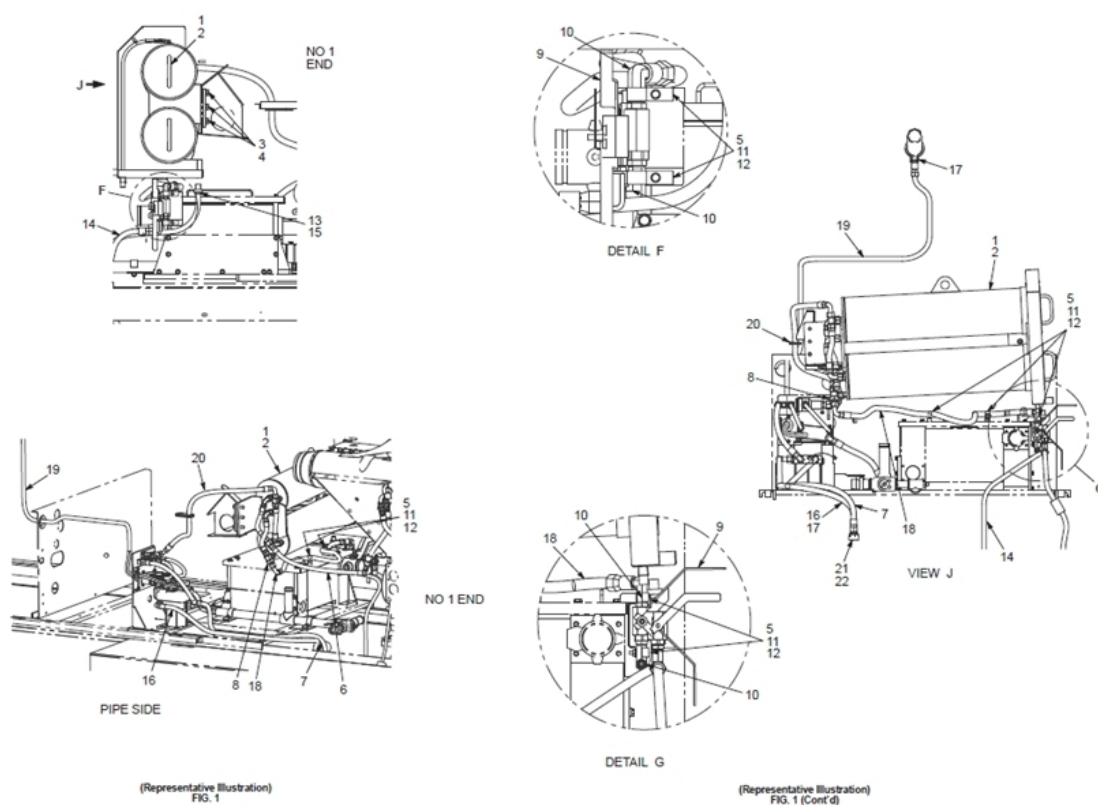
Renewal Parts Catalogue Part B - Partial Fuel System Assembly Drawing (GE Transportation 2014)
